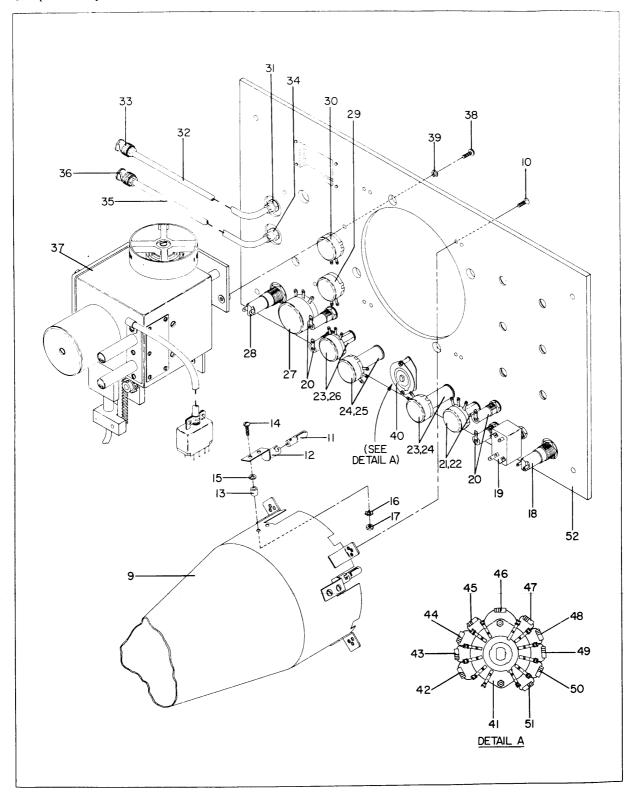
Upper Panel Assembly, Rear View (Sheet 2 of 2 Sheets), Index Nos. 9 through 52
